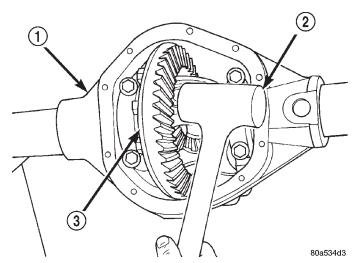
Seat Ring Gear Side Differential Dummy Side Bearing
